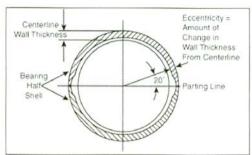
Without bearing "out of round" or eccentricity during housing bore load distortion rod bearings would contact the crankshaft shaft and fail. Image courtesy of Federal-Mogul.
